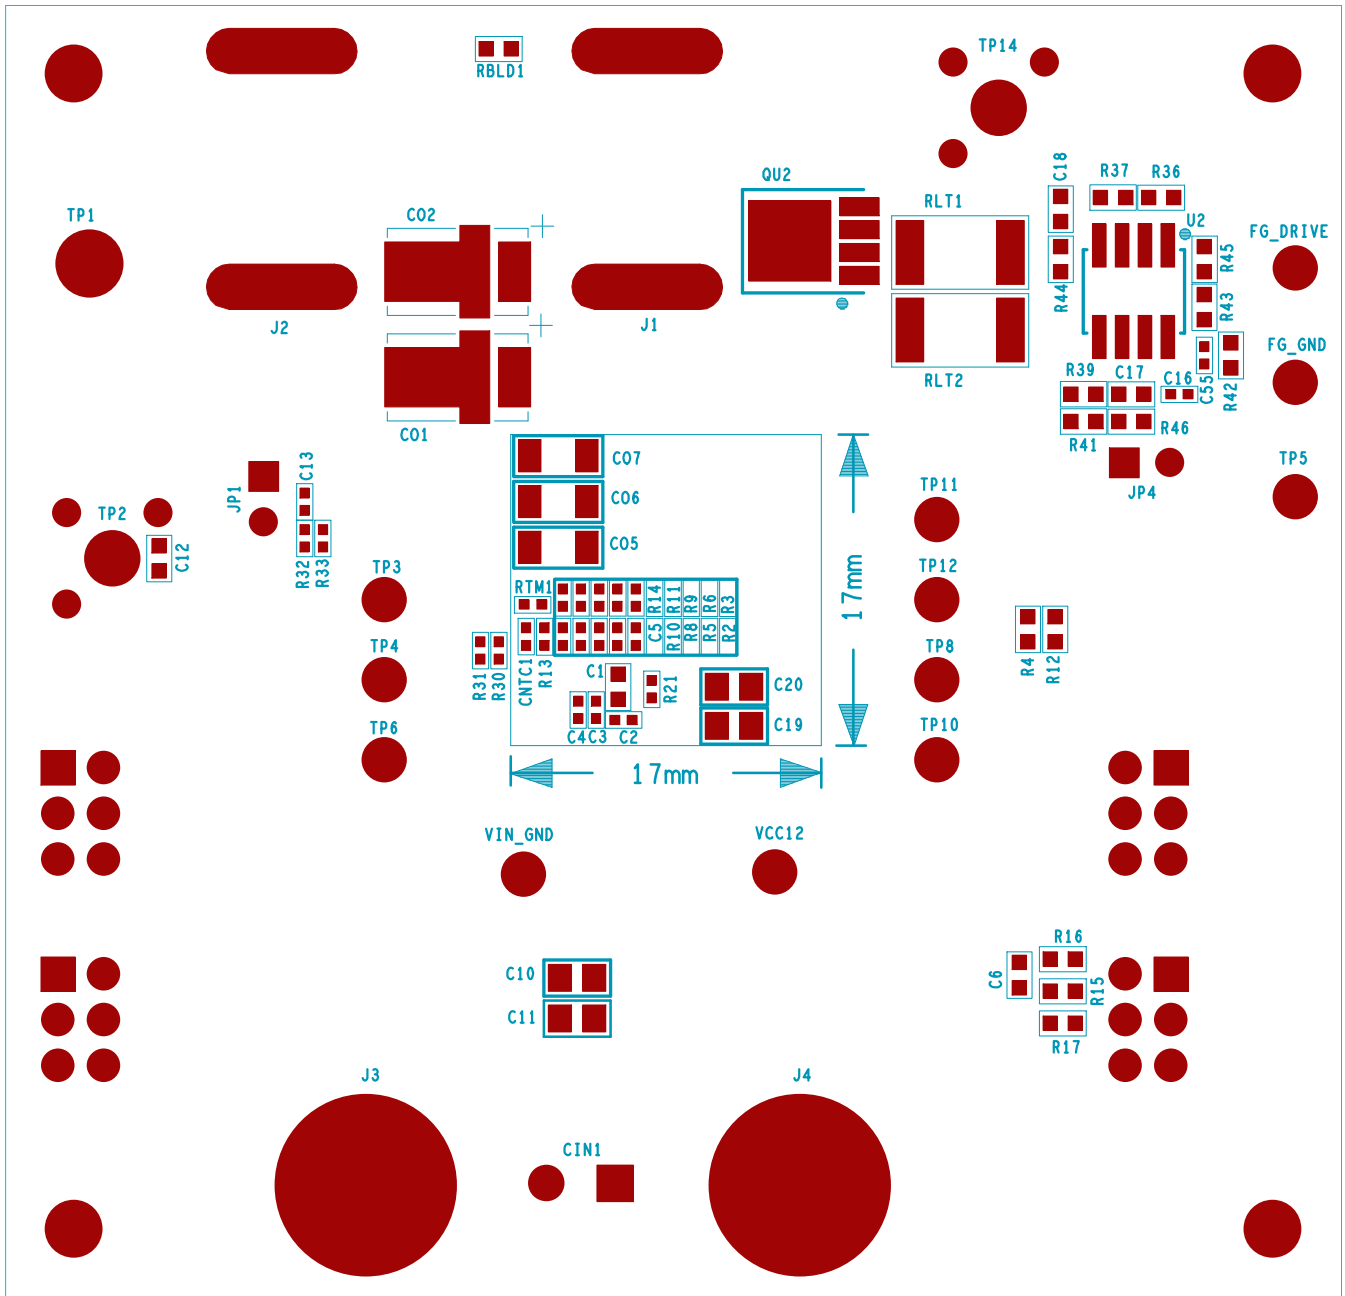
PCB - BOTTOM ASSEMBLY (TOP VIEW)
